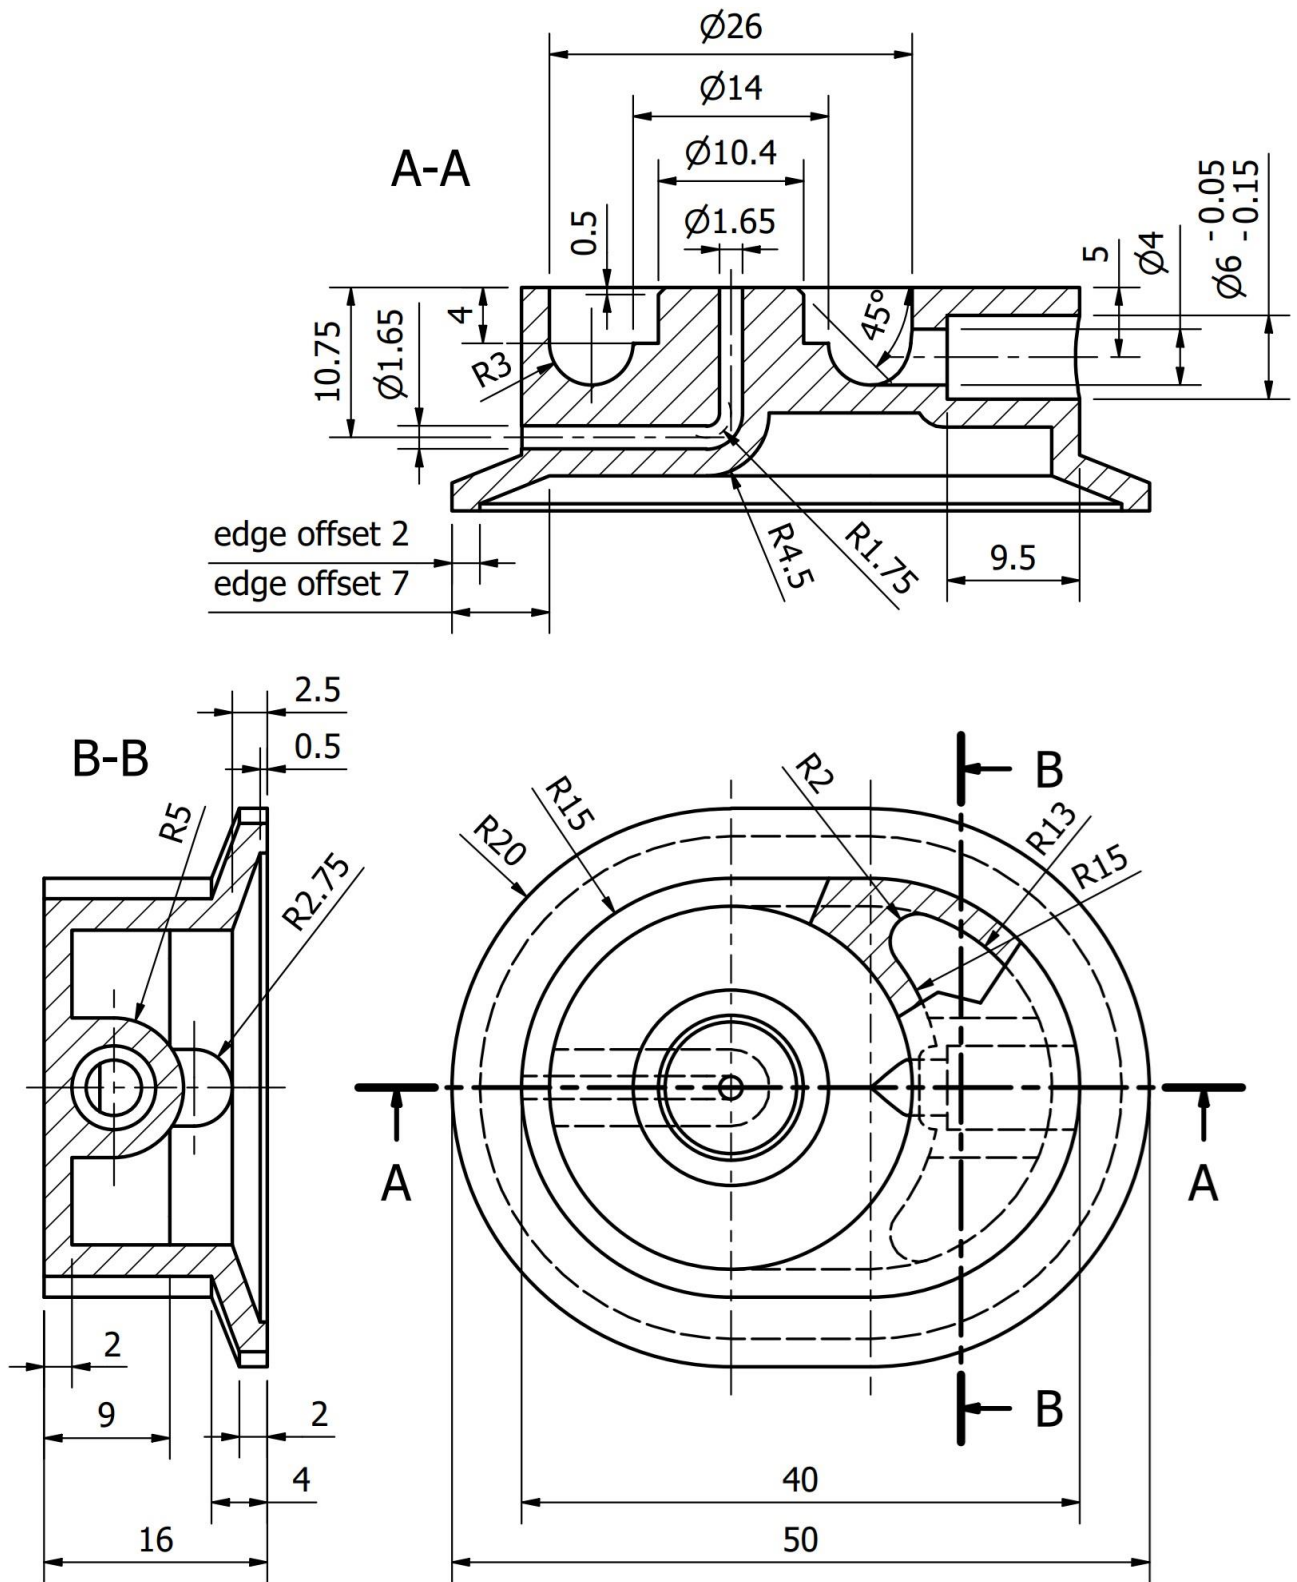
ISO technical drawing of the scaffold housing (dimensions in mm).
